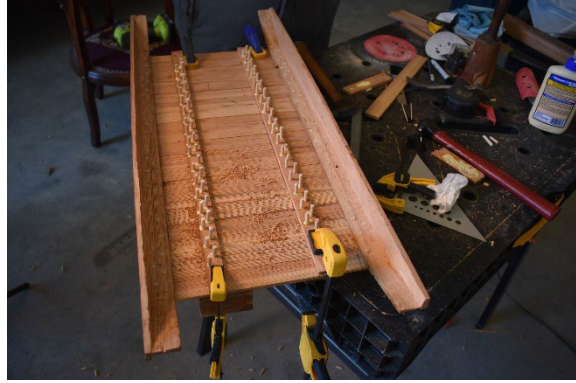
Stringer pieces in place and fastened to exterior planking with four treenails for each plank (Photo by Michaela Hoots).
